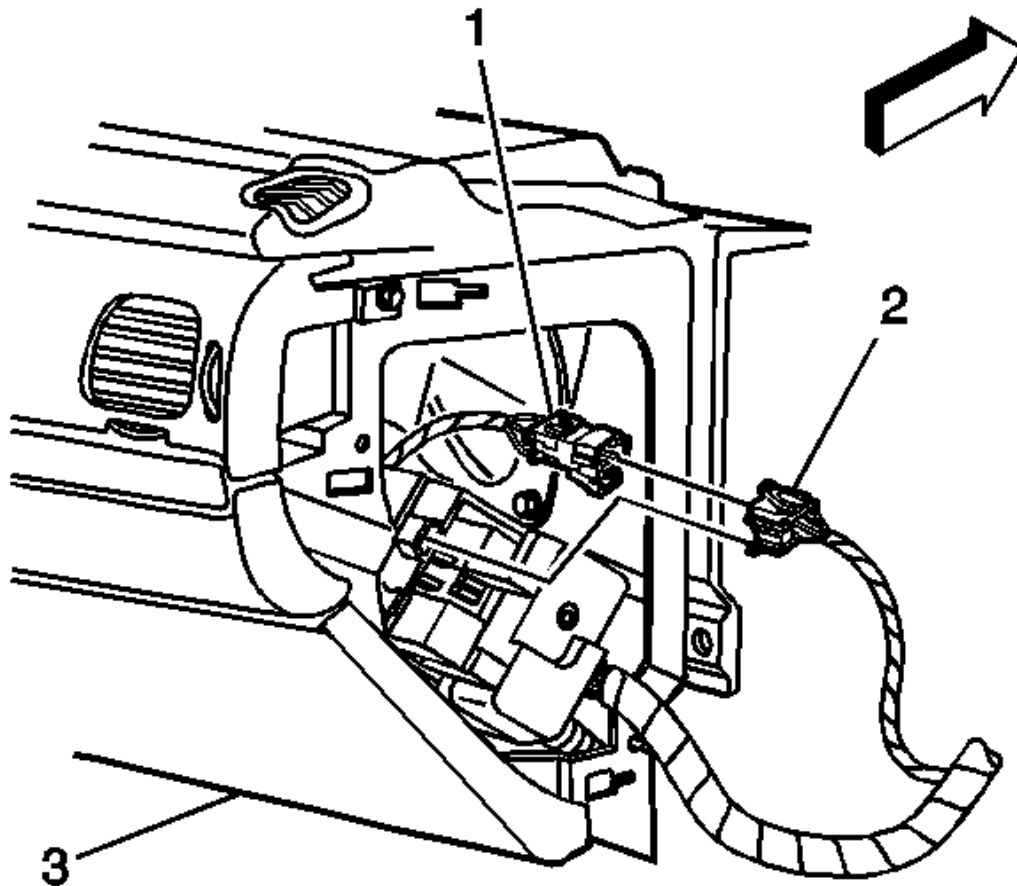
Identifying I/P Module Connector To Vehicle Harness Connector
